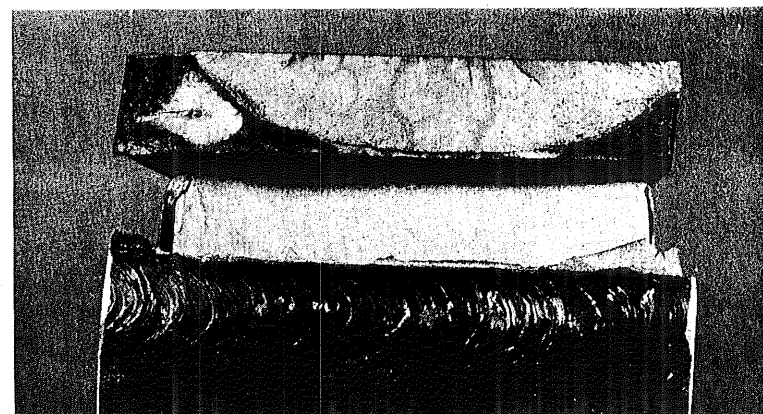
RESULTS OF FATIGUE TESTS OF LONGITUDINAL BUTT-WELDED JOINTS
